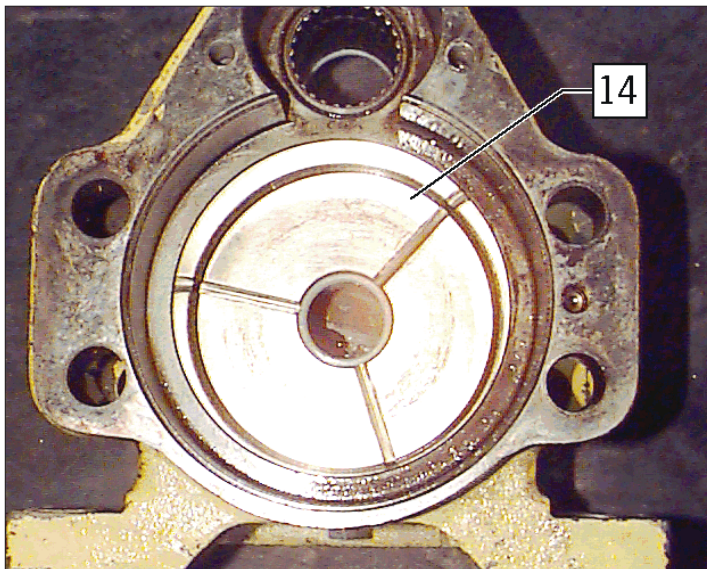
Rotation Housing with Bearing Plate Installed
